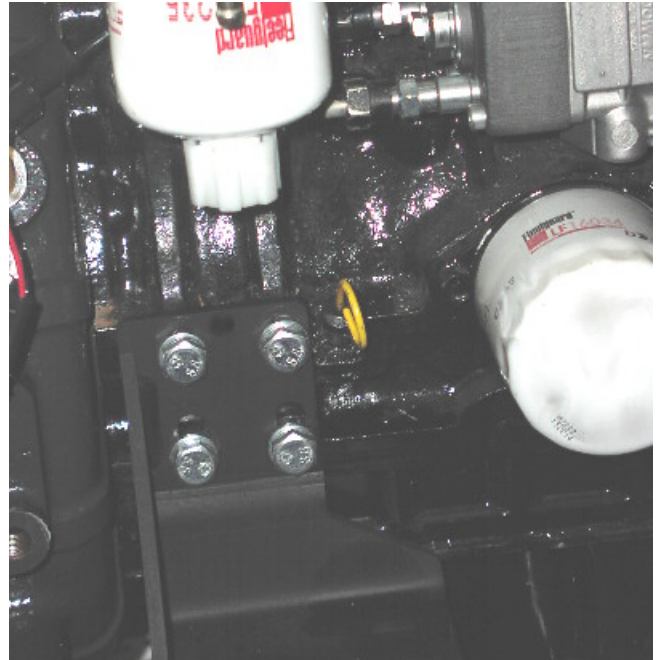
Bracket mounted. Notice slotted holes for adjustment. Slide bracket up, towards fuel filter, before tightening bolts.
